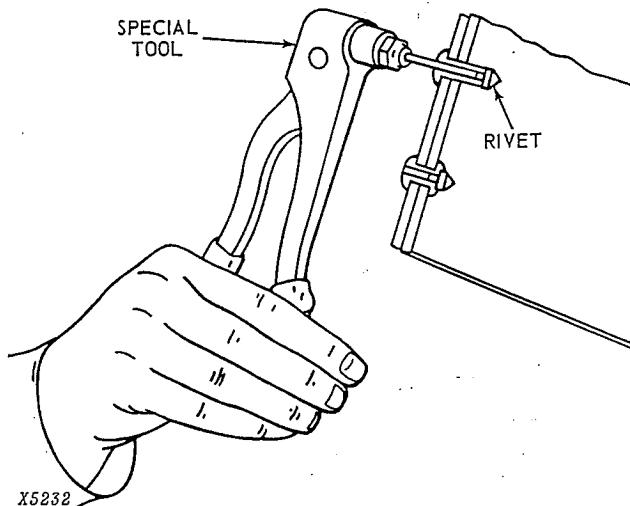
Installing a Special Rivet in a "Blind" Hole
